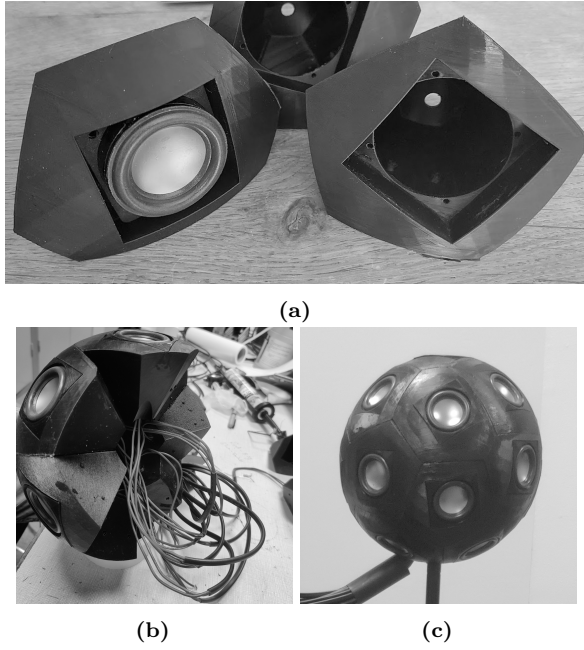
(a) The spherical fraction shape loudspeakers are printed using an FDM 3D printer. (b) The SLA is assembled by gluing. (c) Final result
